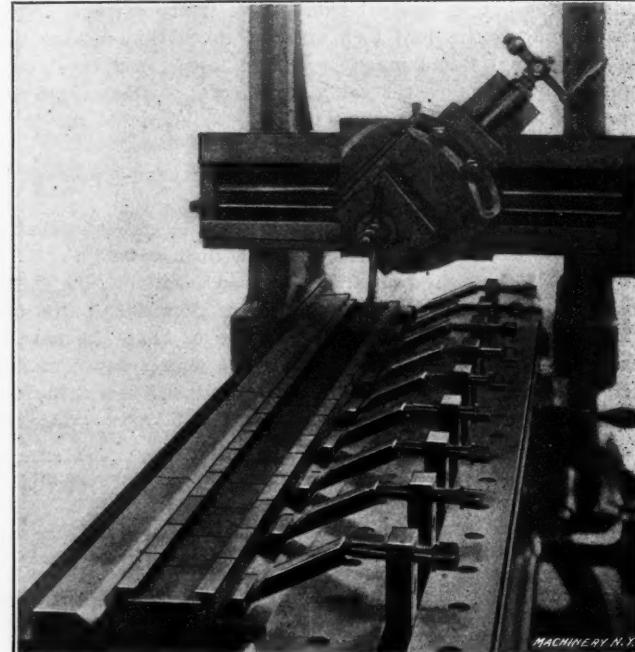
Method of Clamping Work on Planer Bed at Elgin Tool Works, Elgin, Ill.
